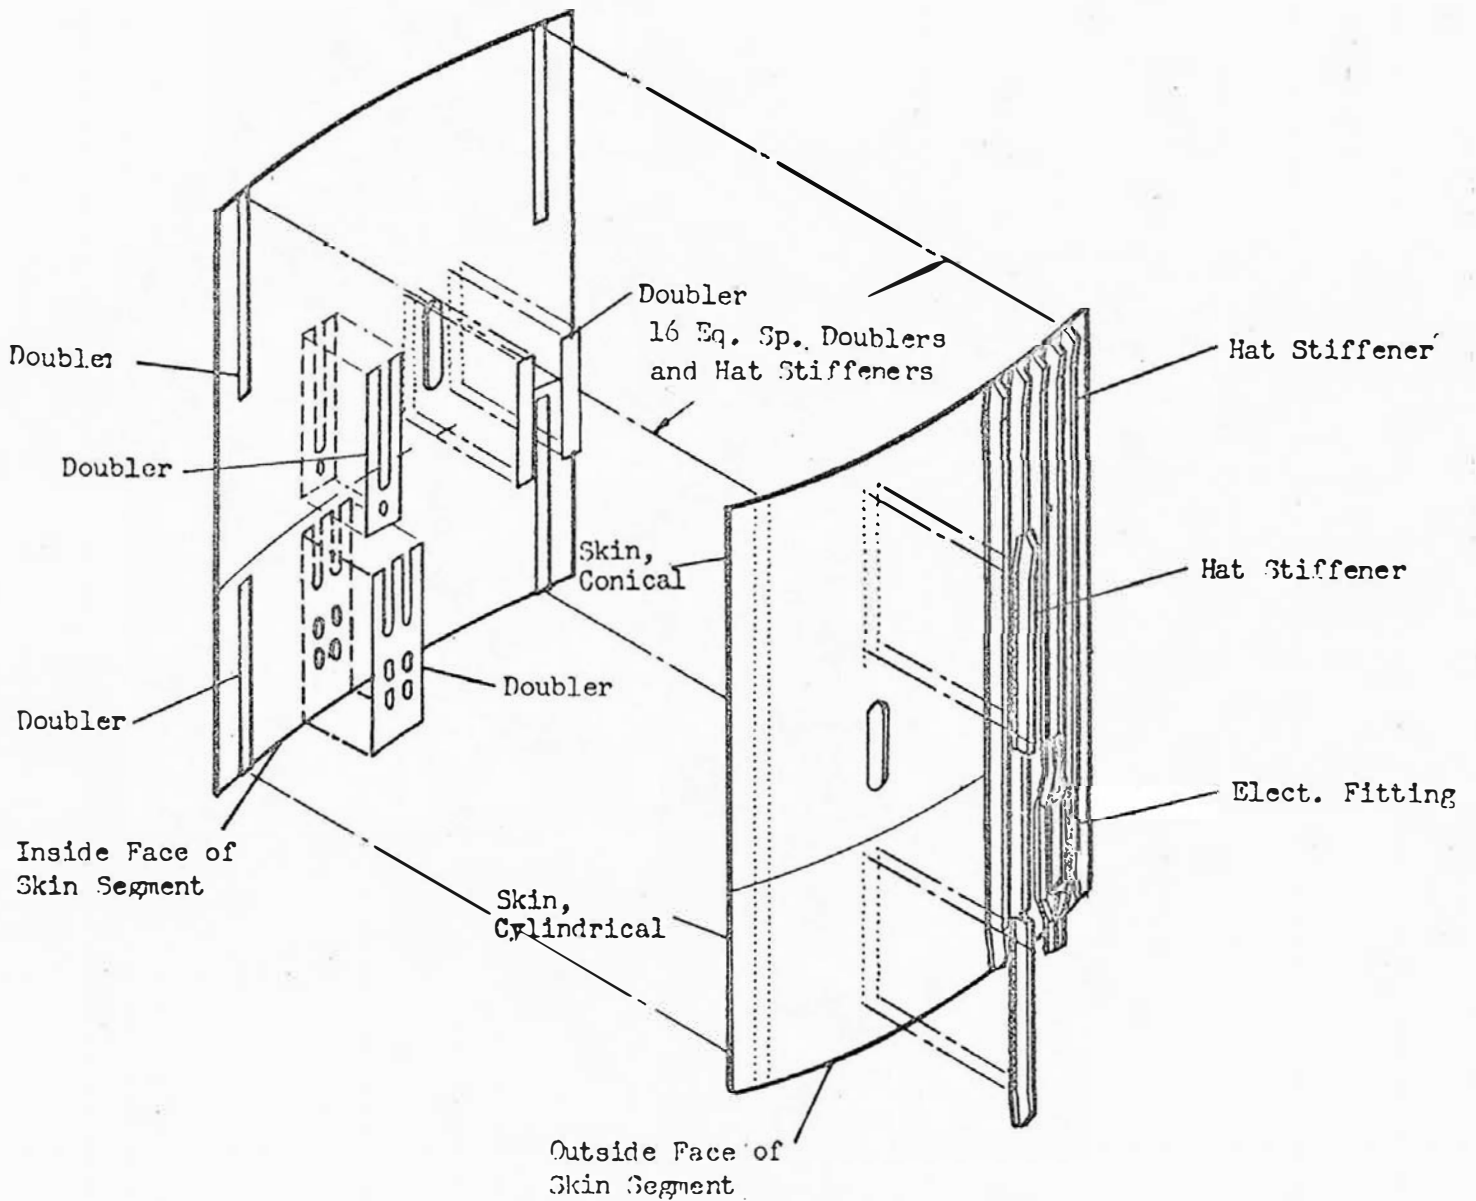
Skin Segment Assembly (Electrical Cable Inlet Fitting) 60B14600-1-900
